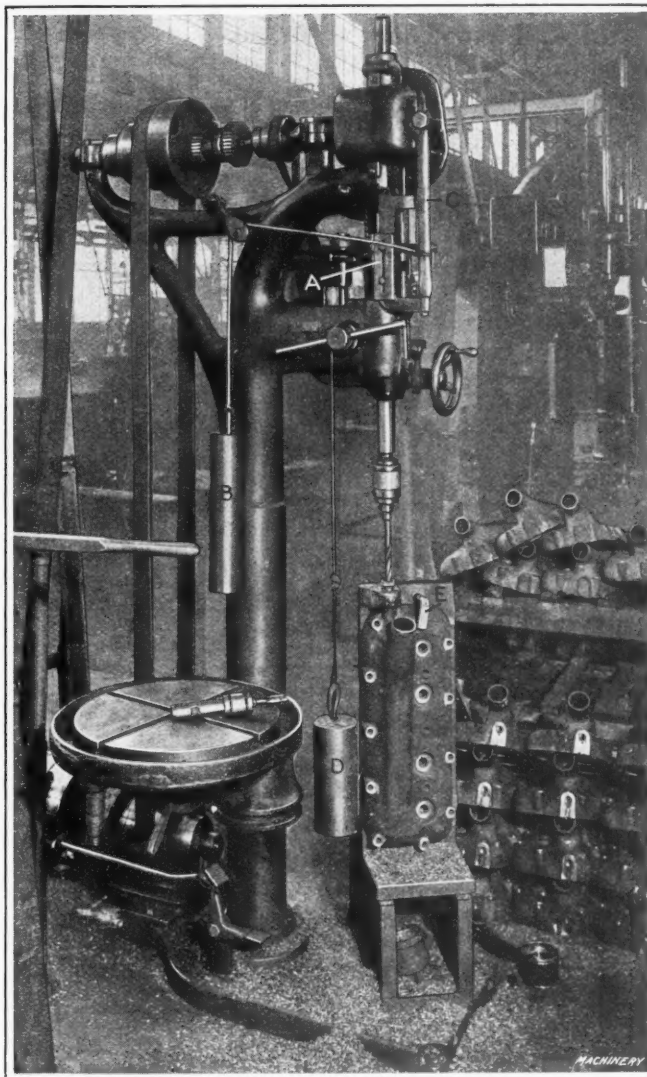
Reed-Prentice 21-inch Drill Press tooling up for drilling and tapping hole in Fan Stud Boss on Cylinder Heads—Note Special Reversing Mechanism for backing out Tap, and Wield Quick-change Chuck
